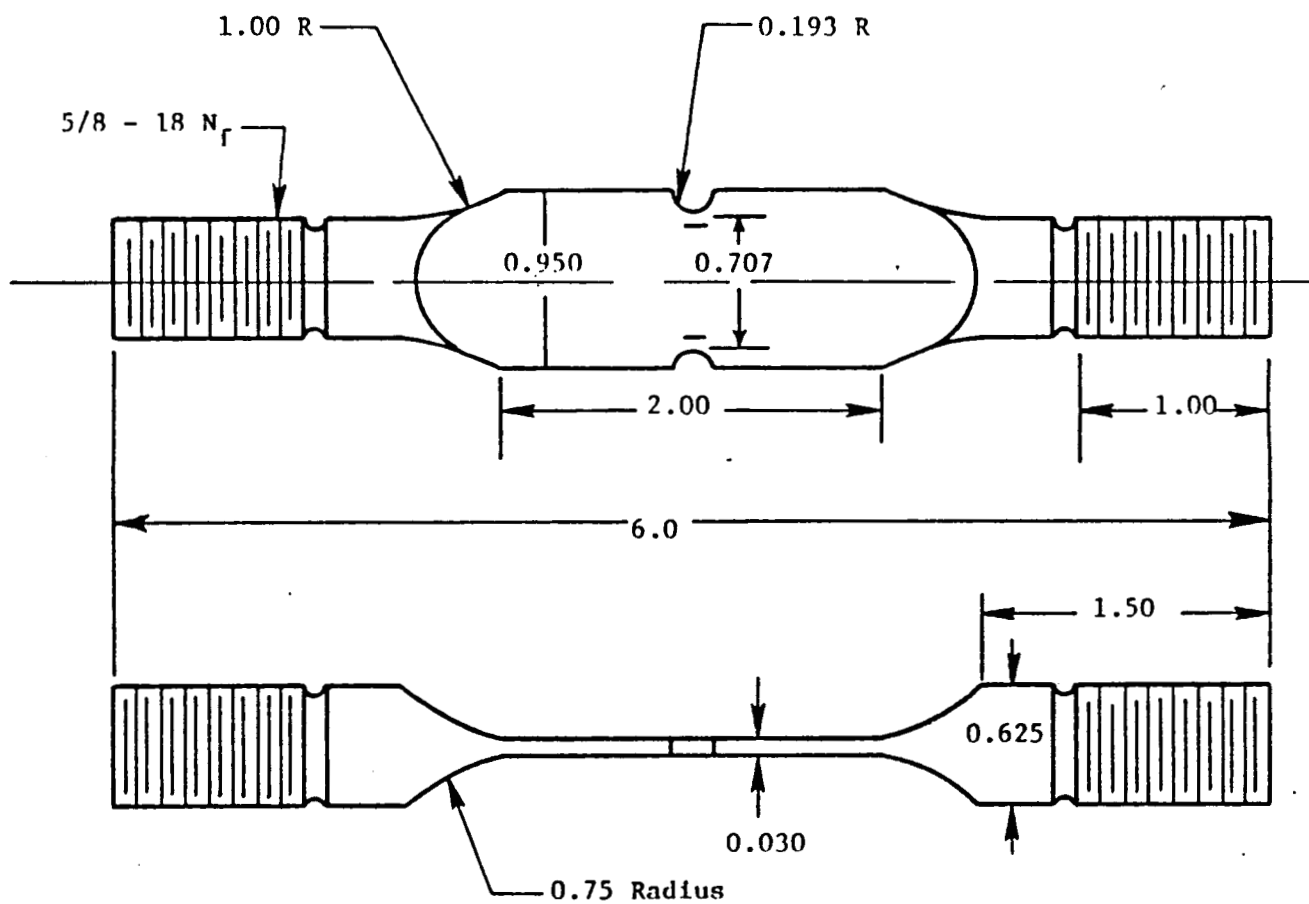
Thin Wall Benchmark Notch Specimen ($K_t = 1.9$).
